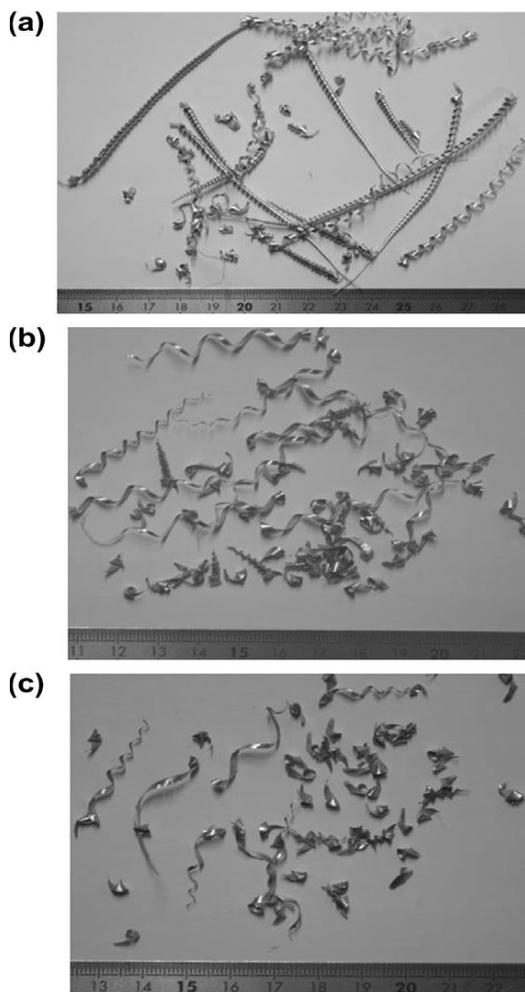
Influence of the machining parameters on the form of aluminium chips after drilling with coated drill.
